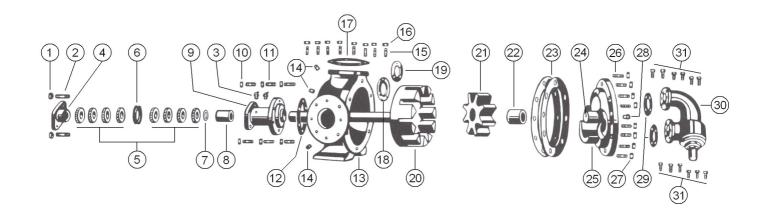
EXPLODED VIEW MODEL O32, M32 AND N32 PUMP
